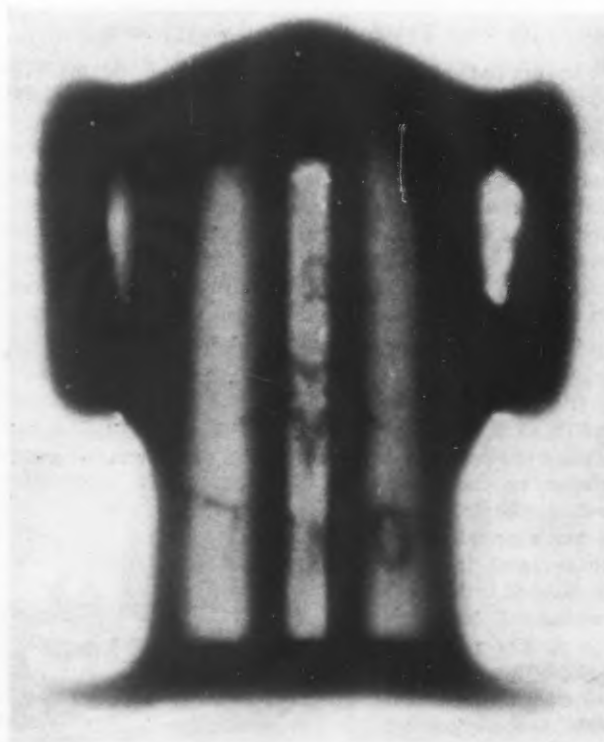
Radiograph of Steel Casting for High-Pressure Valve Fitting
